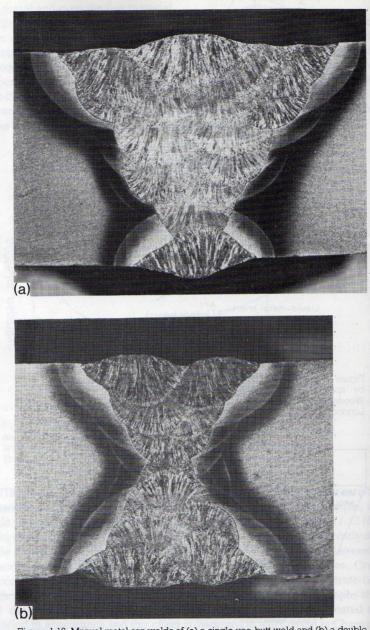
Manual metal arc welds of (a) a single vee-butt weld and (b) a double vee-butt weld. The plate thickness in both cases is 18 cm. (By courtesy of ESAB, Gothenburg)
